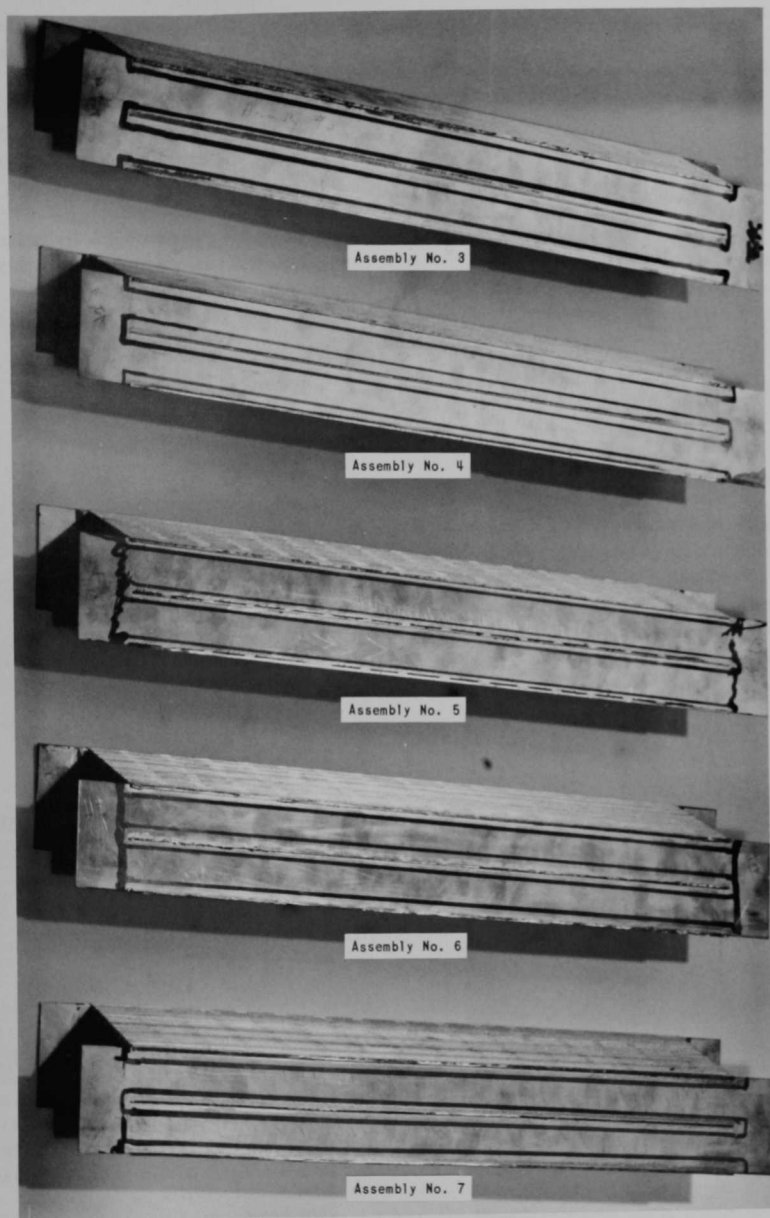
As-brazed Appearance of Assemblies No. S/N 452-IA-3 to -7
